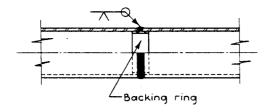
FIG. A: V-BUTT WELD; SIMILAR TUBE SIZES (Compression Splice)
